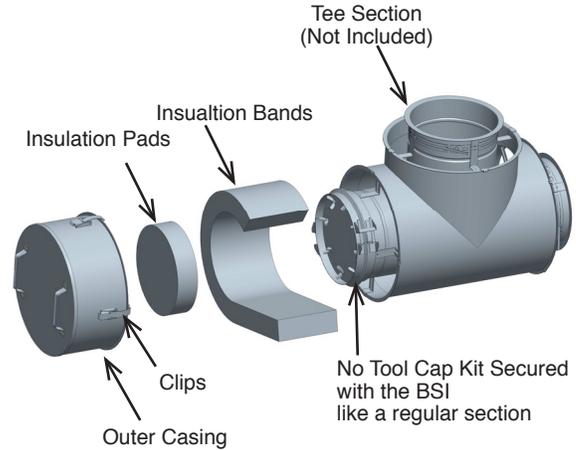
Step 1 & 2 for the No-Tool Tee Cap Installation
